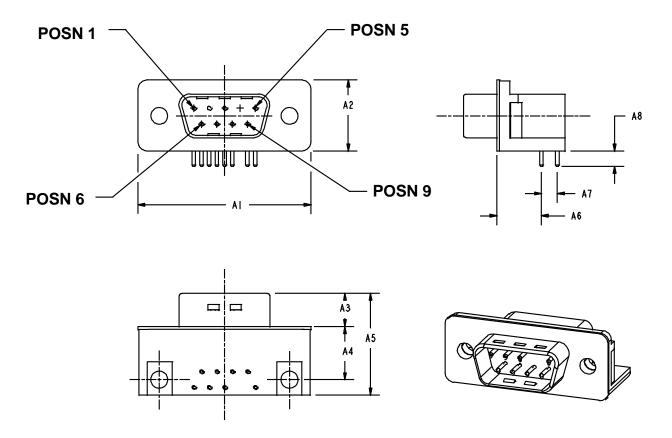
Free board right angle thru hole (version 1) overview and outline dimensions
